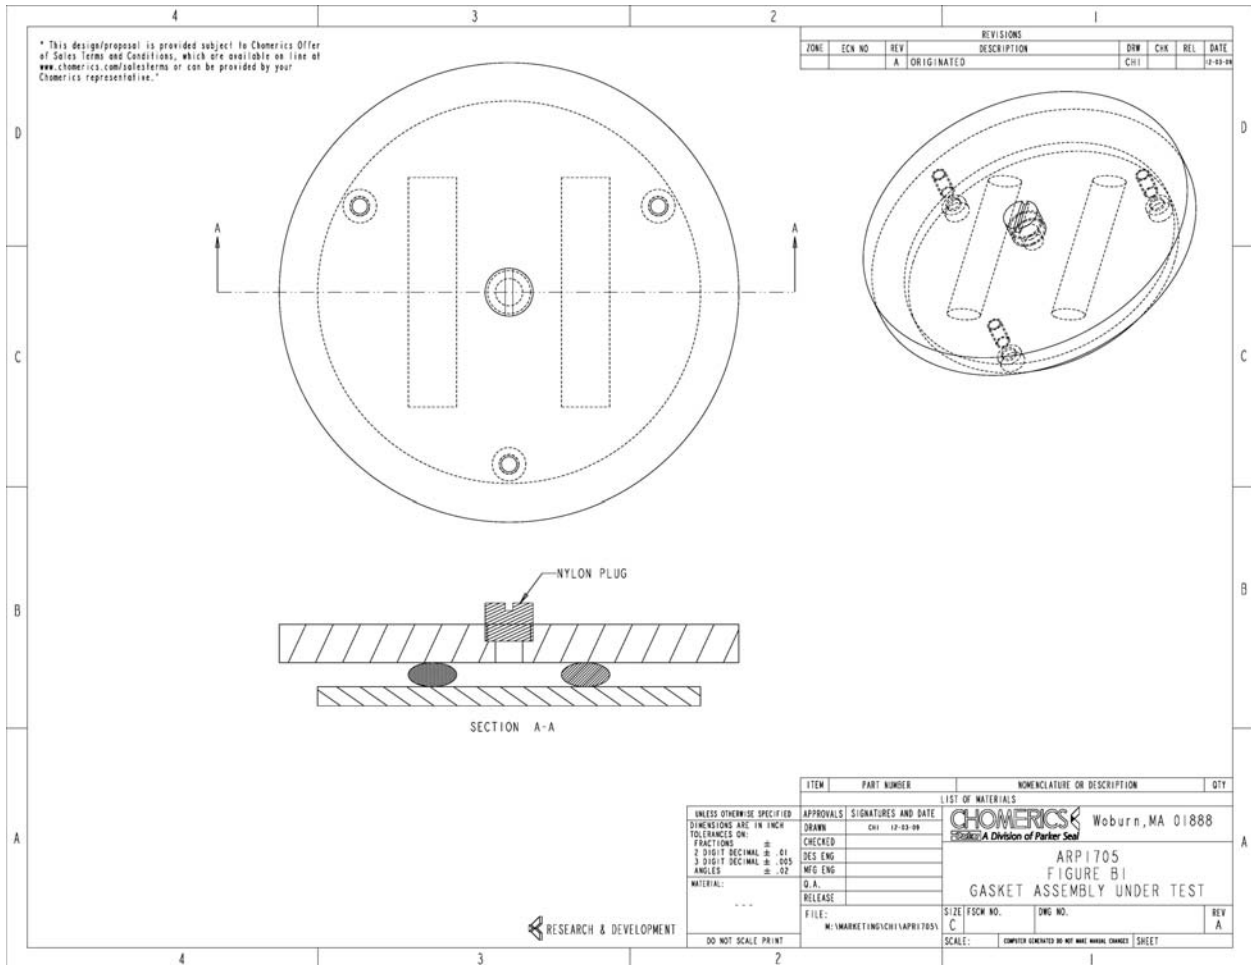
CHO-TP10 Gasket Configuration – Assembled Test Plate Set
